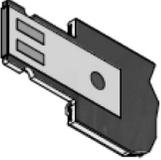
Fortimo InstantFit LED module - bottom view showing electrical contacts.
